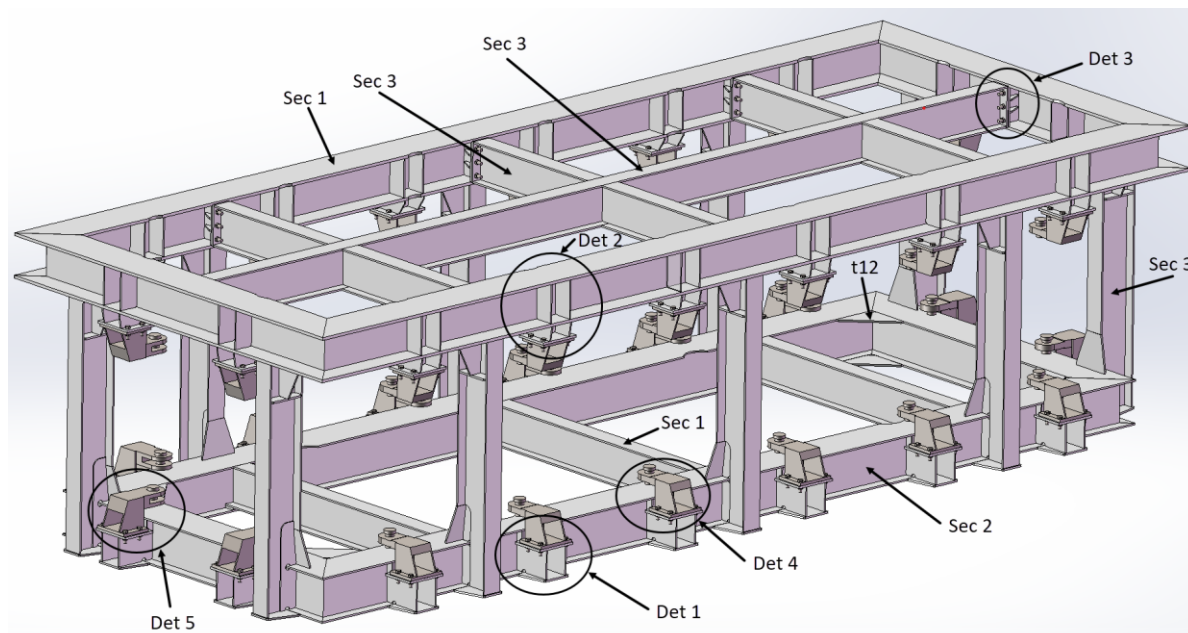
Real project Pontoon with selected elements that should be welded.
